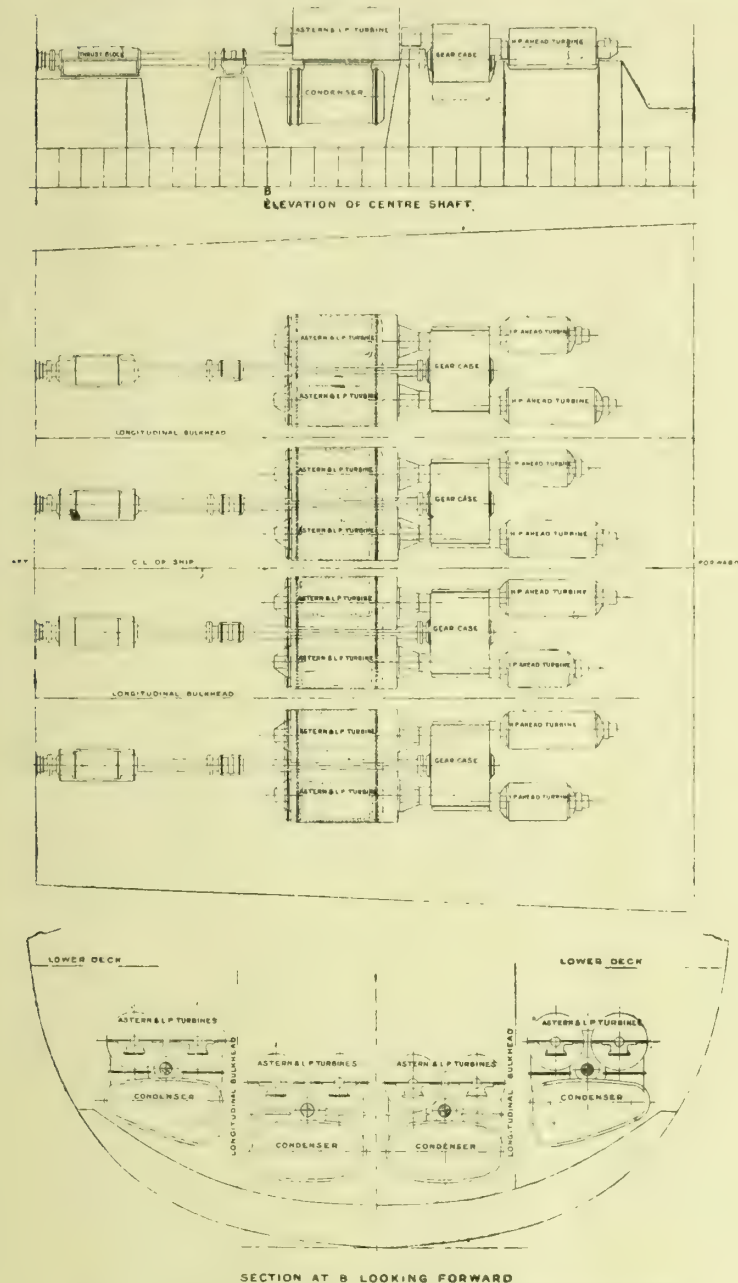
TYPICAL INSTALLATION OF GEARED TURBINE MACHINERY FOR A LARGE ATLANTIC LINER.
